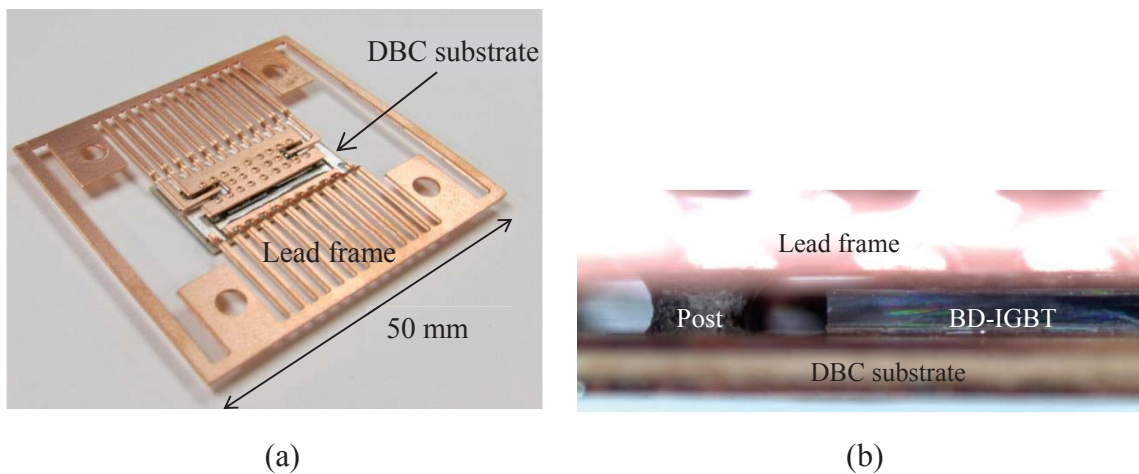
Fabricated module with four solder posts (a) and side view of the packaged module (b) using the same packaging steps in Figure 5-5.
